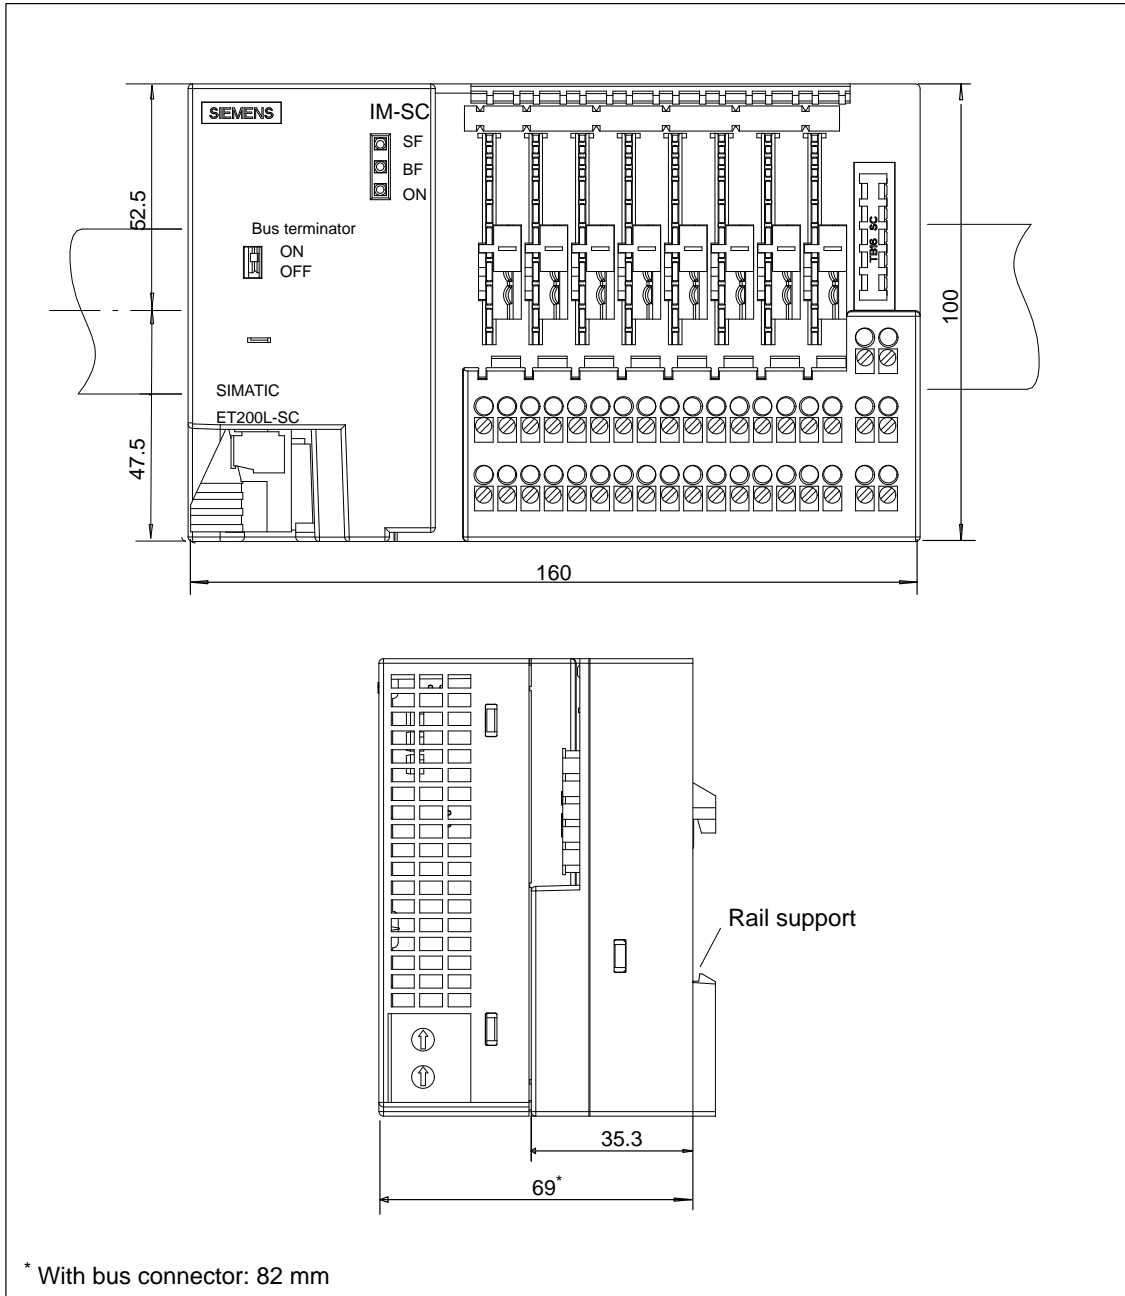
The TB 16IM-SC Terminal Block with the IM-SC Interface Module Mounted, Dimension Drawing
